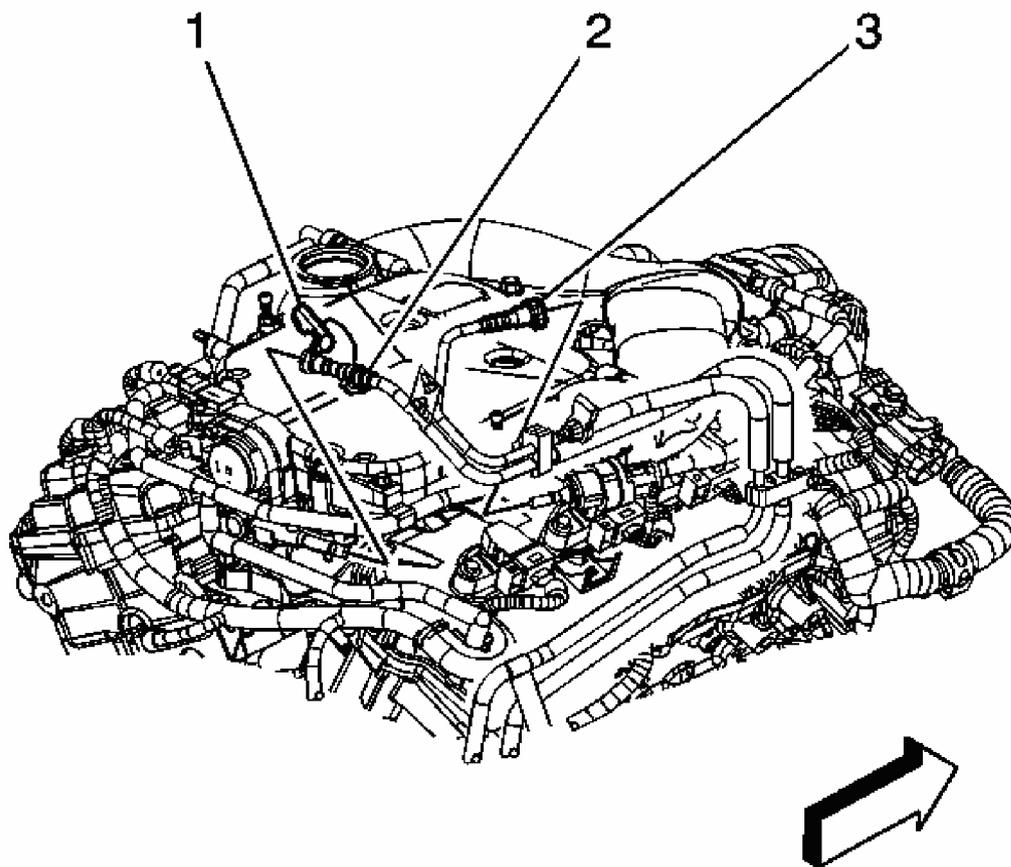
View Of Cooling Fan Wiring Harness & Electrical Connectors
